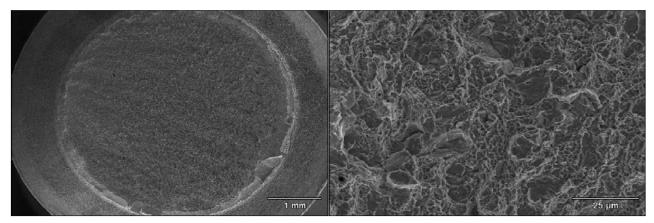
ISL test specimen RSL HTP #089 tested against the SLT specimen above. The ISL test *passed* after being tested within one hour of Mn-P. The left image shows a contiguous shear lip around the fracture surface and the right image shows a fracture surface at 1000x magnification in which the fracture morphology is predominantly ductile (MVC).
